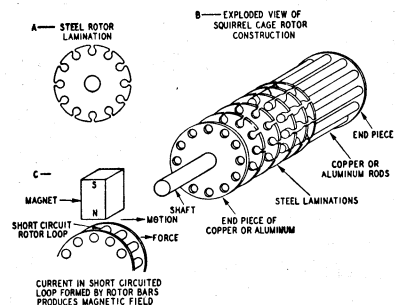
A-B-C—"Squirrel Cage" Rotor Assembly
